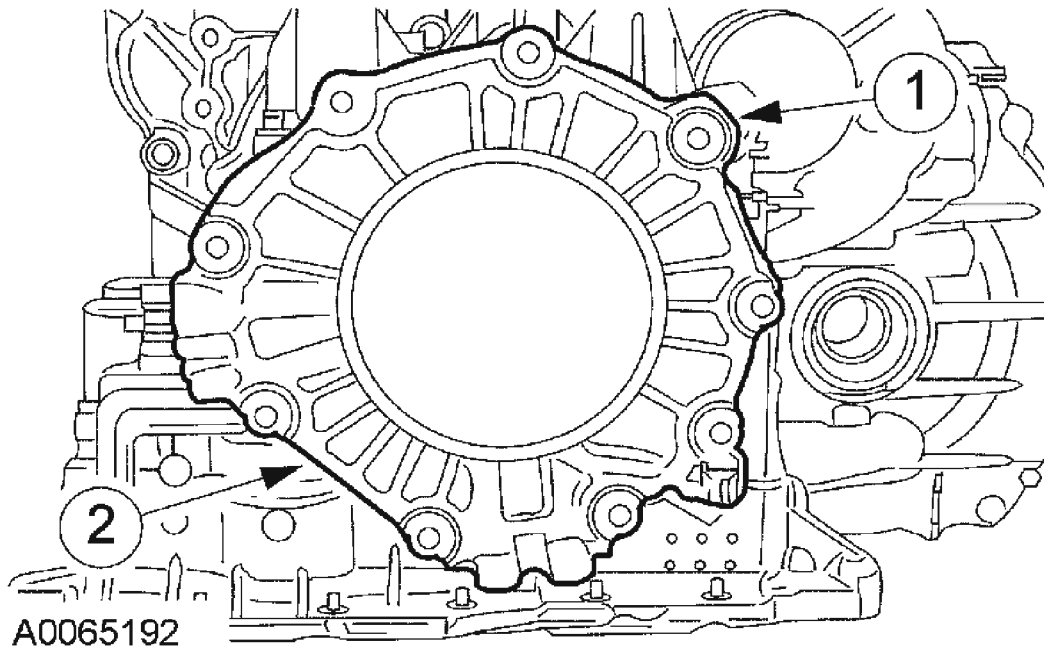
Measuring Gap Between Transaxle End Cover And Transaxle Assembly
